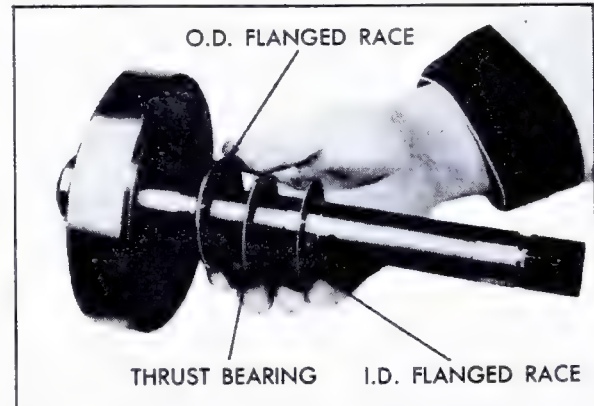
Installing Races and Thrust Bearing on Inner Face of Rear Internal Gear
